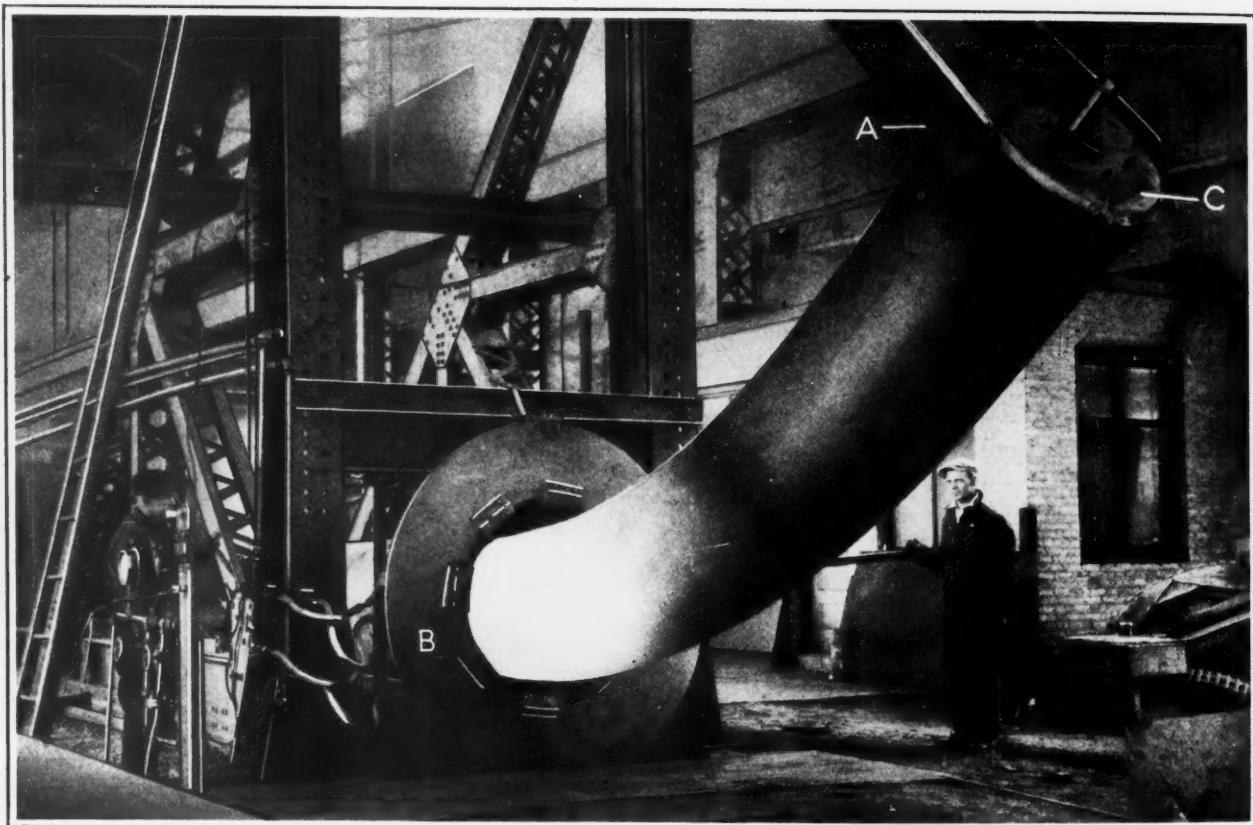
Equipment Used in Bending Large Pipe Readily to any Predetermined Radius
